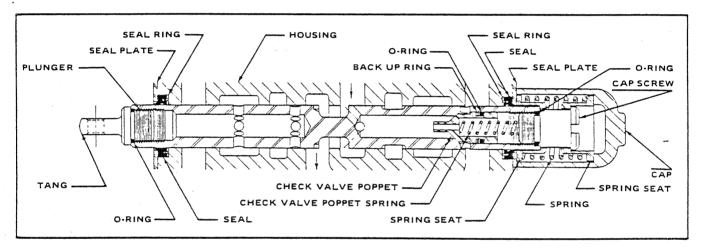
Double Acting Series - Spring Centered Plunger (Hydraulically Balanced)
